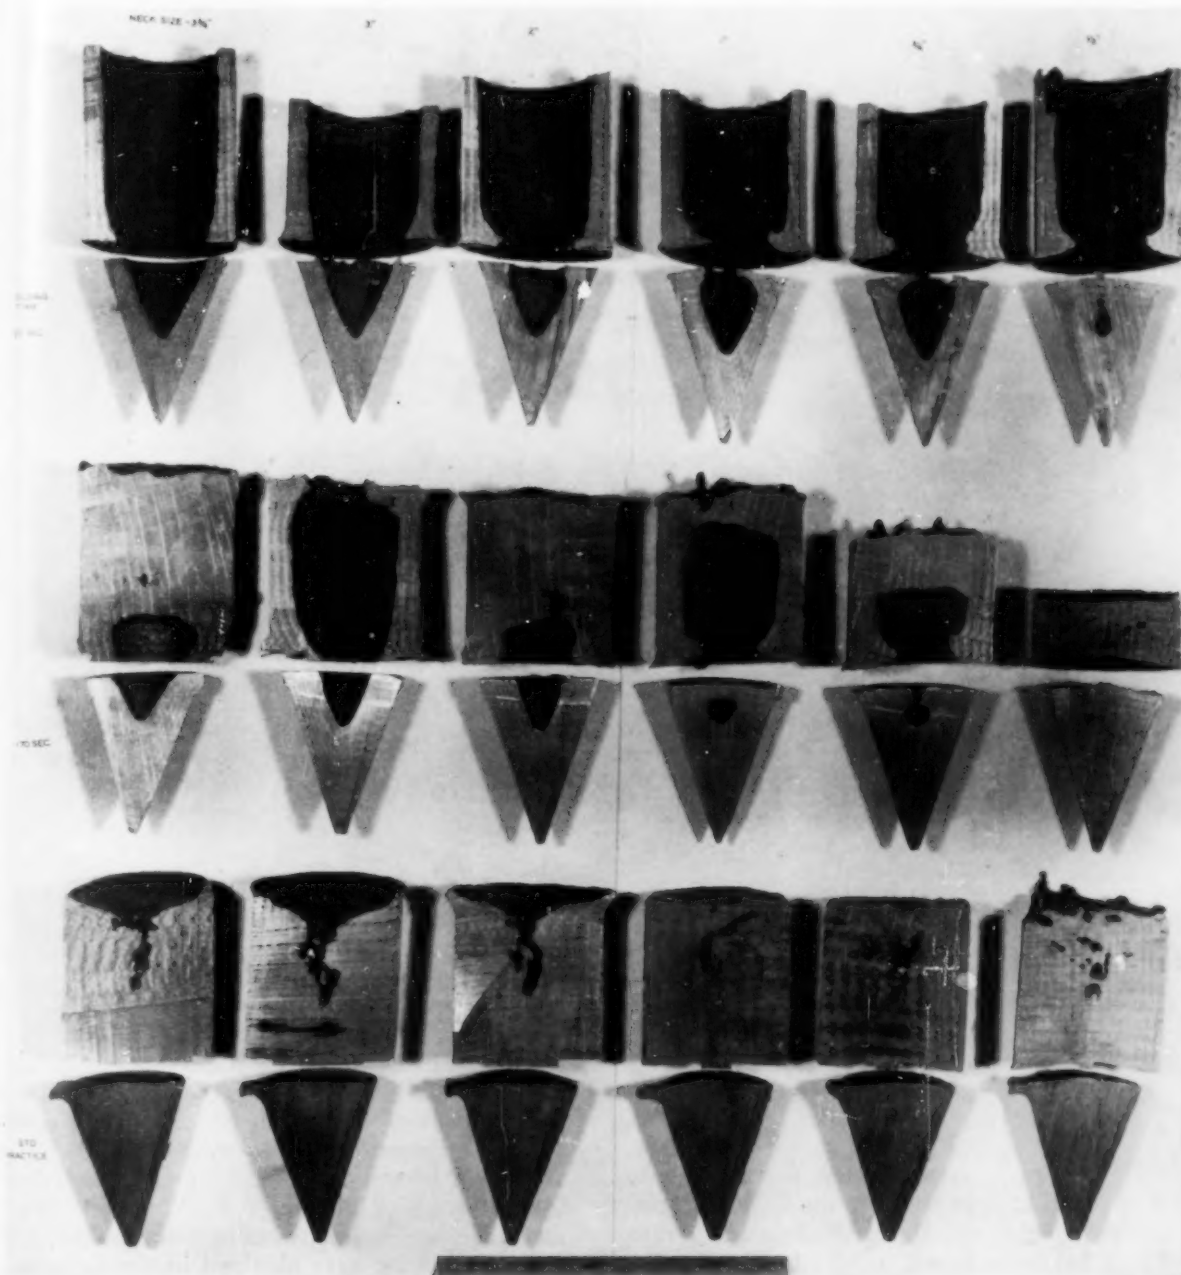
Steel Cone Castings Using  $\frac{1}{4}$ -in. Thick Knock-Off Cores. Castings were bled at timed intervals after pouring.
